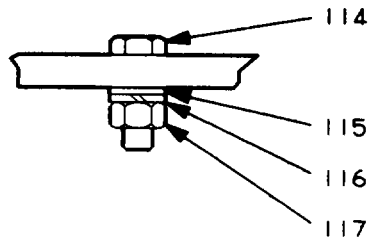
SHELTER ASSEMBLY (SHEET 8 OF 24)
